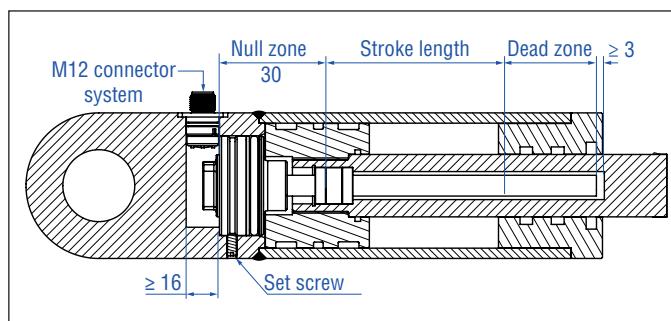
Example of In-Cylinder assembly with M12 connector system
